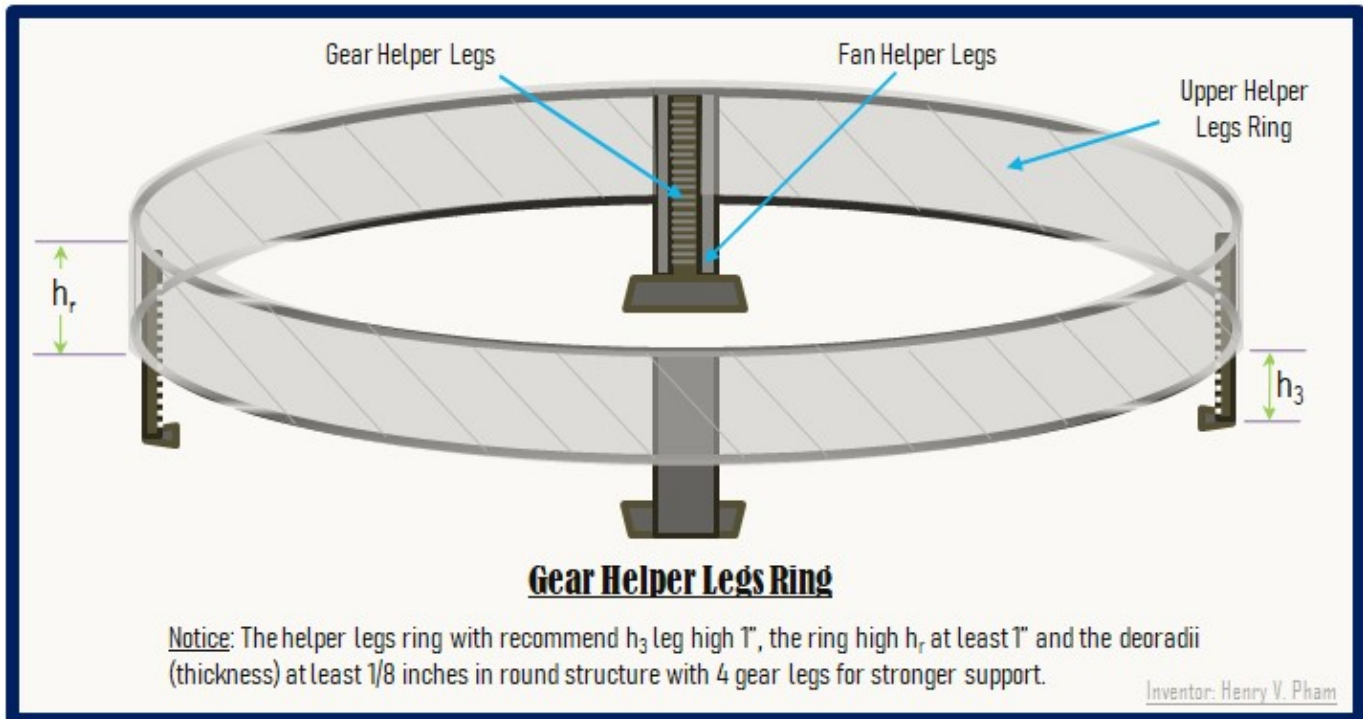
360° Stand G-Rotator Fan – Gear Helper Legs Ring
